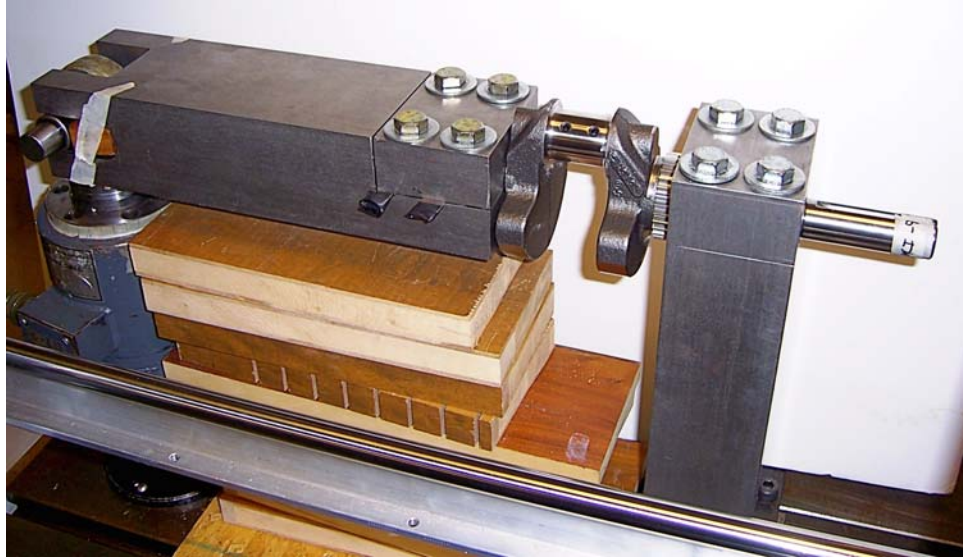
Test set-up for the ductile cast iron crankshaft.
